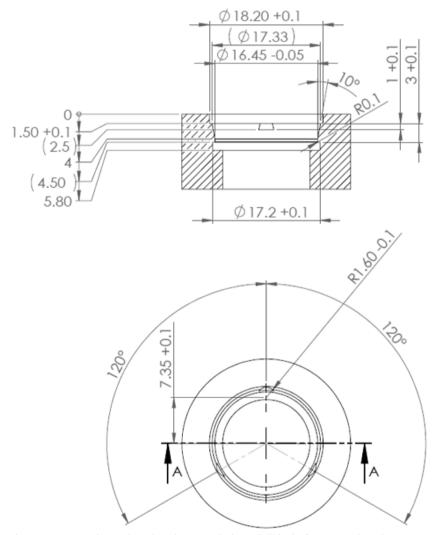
Dimension drawing: Workpiece drill hole for mounting the MDS D522 special version
